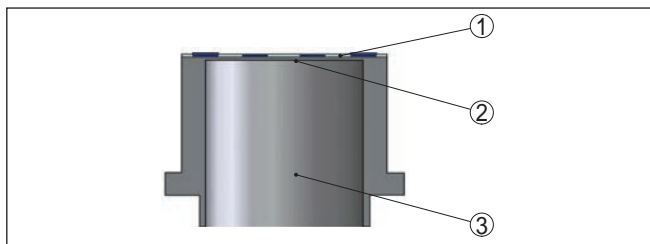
Configuration of the measuring system with strain gauge (DMS) sensor element
